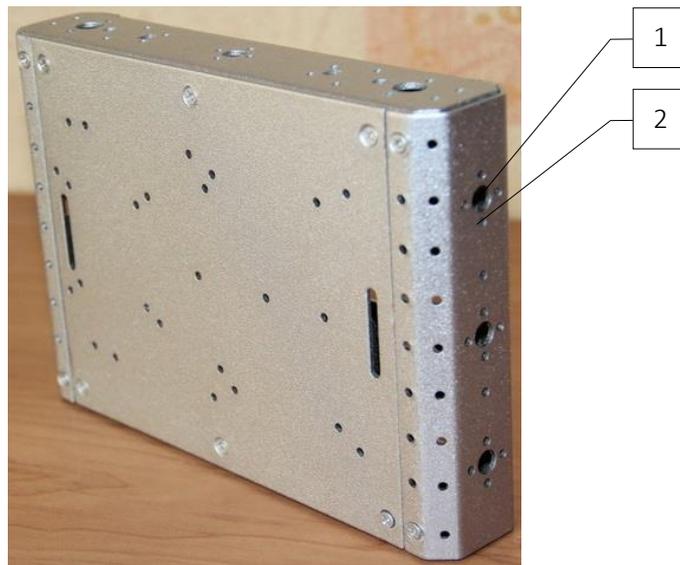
Universal chassis for the robots. 1 – Hole for a shaft of the DC motor, 2 – holes for fixing the motor [29].
